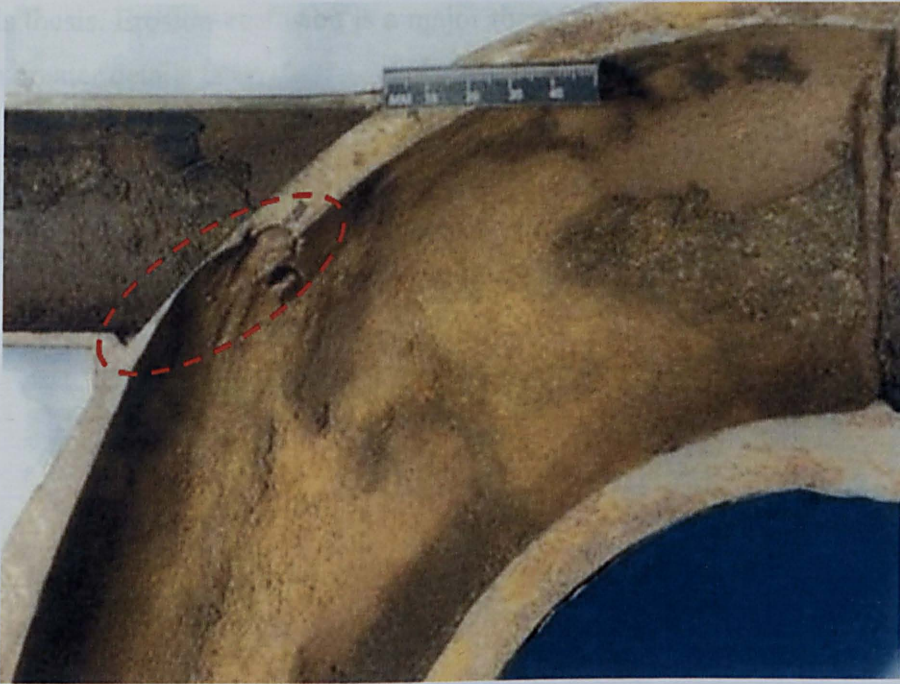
The failure at a pipe elbow due to erosion-corrosion
